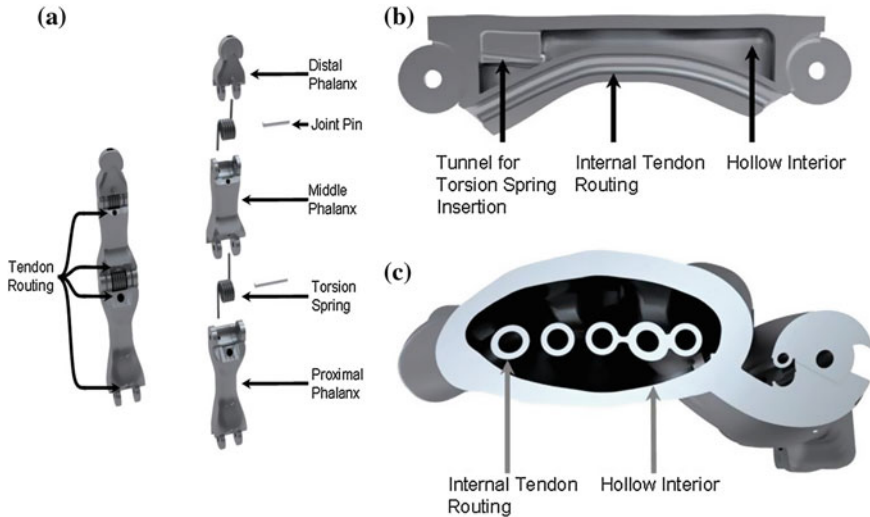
Detailed views of the intrinsic hand prosthesis. a Unexploded and exploded views of a finger showing the phalanges, torsion springs of the joints, and joint pins. b Sagittal section of a proximal phalanx, showing the tunnel for torsion spring insertion, internal tendon routing, and the hollow interior. c Transverse section of the base of the palm, showing internal tendon routing, and the hollow interior. The base of the thumb is visible on the right
